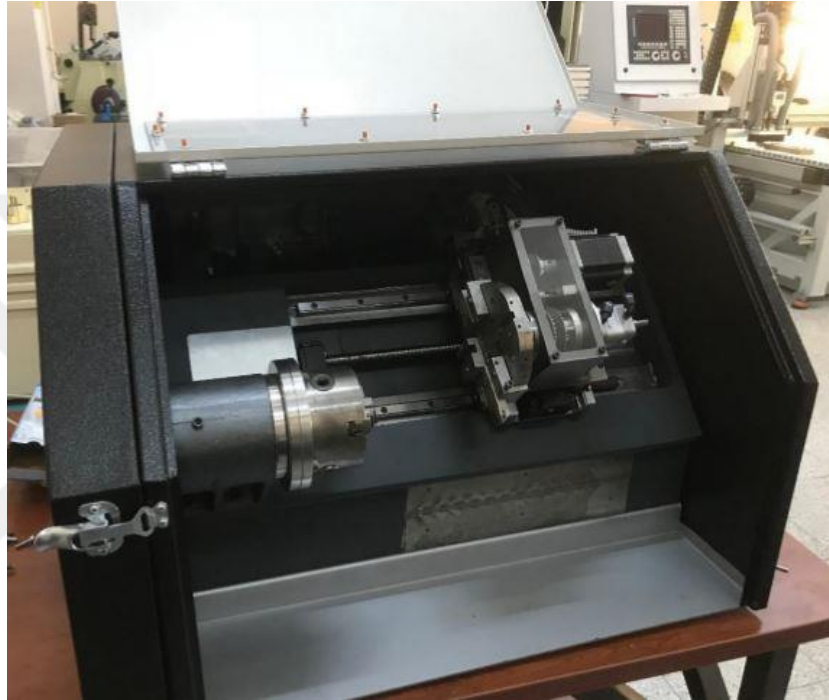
View of the CNC lathe (Personal archive, 2020)
